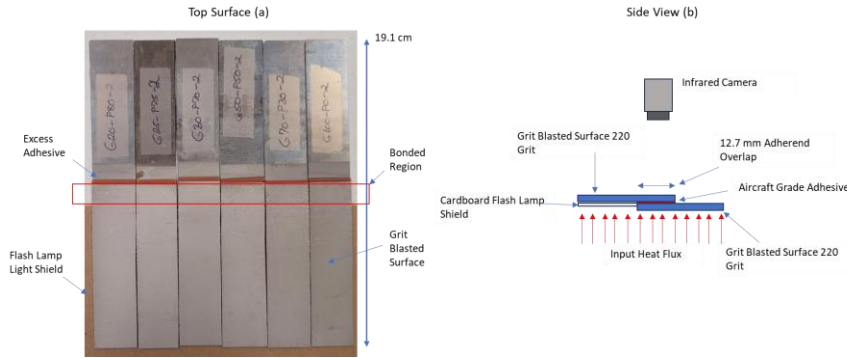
Picture of sample layout for thermal inspection (a) and a side view drawing (b).
